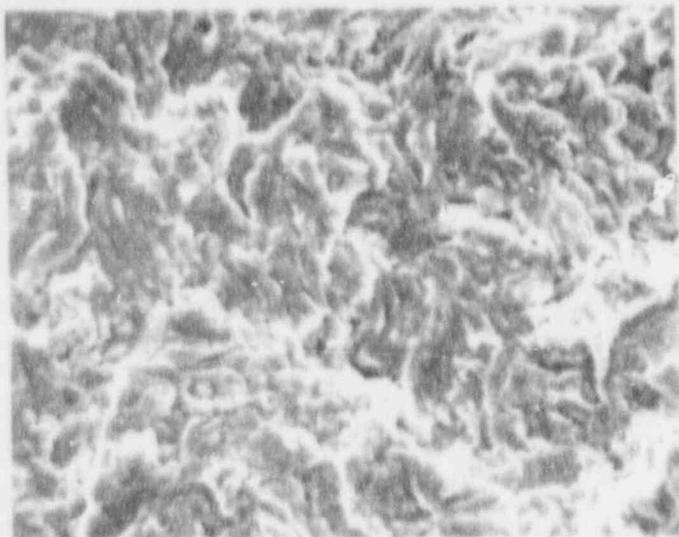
A SEM photograph of cracked bolt 4, illustrating the fatigue zone of the fracture surface, at 1000 X magnification.
